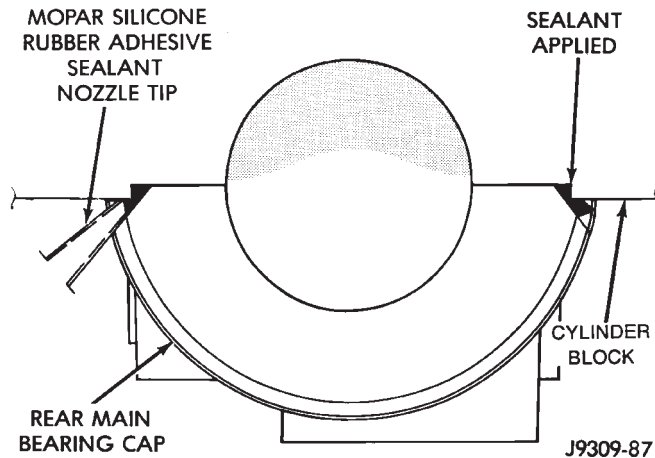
Apply Sealant to Bearing Cap to Block Joint
